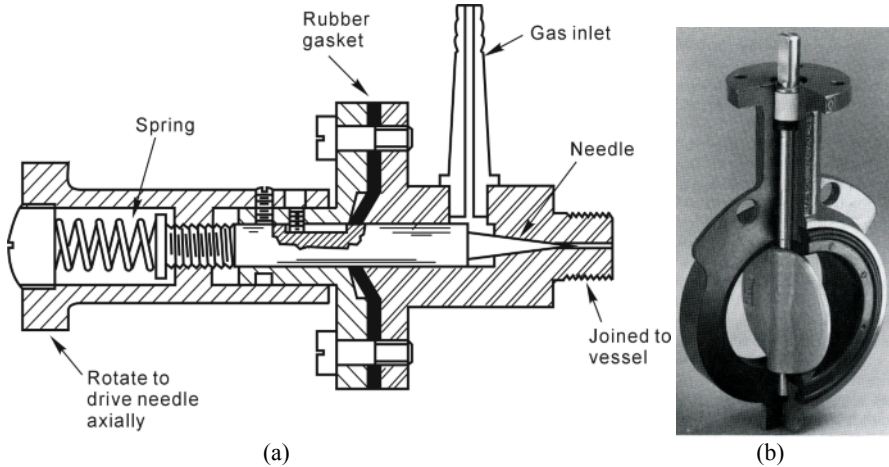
Schematics of two kinds of valves: (a) needle valve [32] and (b) butterfly valve [33]
